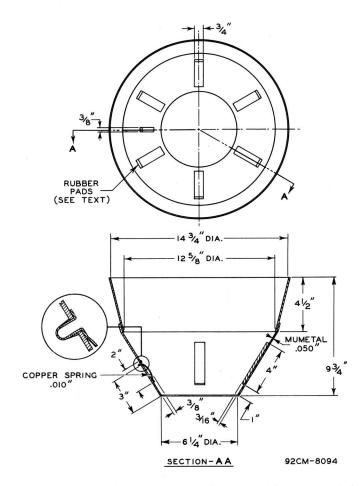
Dimensional outline of typical cone shield made of Mumetal.
